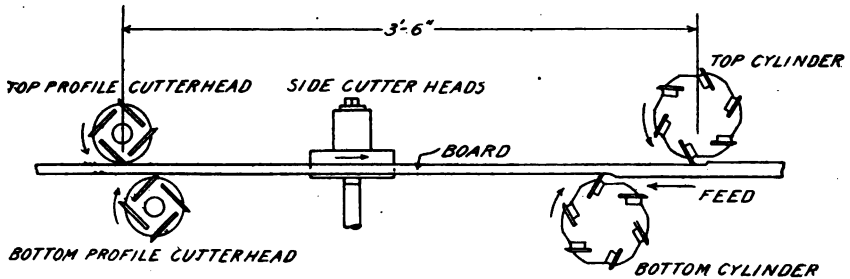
Relative position of cylinders and cutter-heads in planing mill machines.
